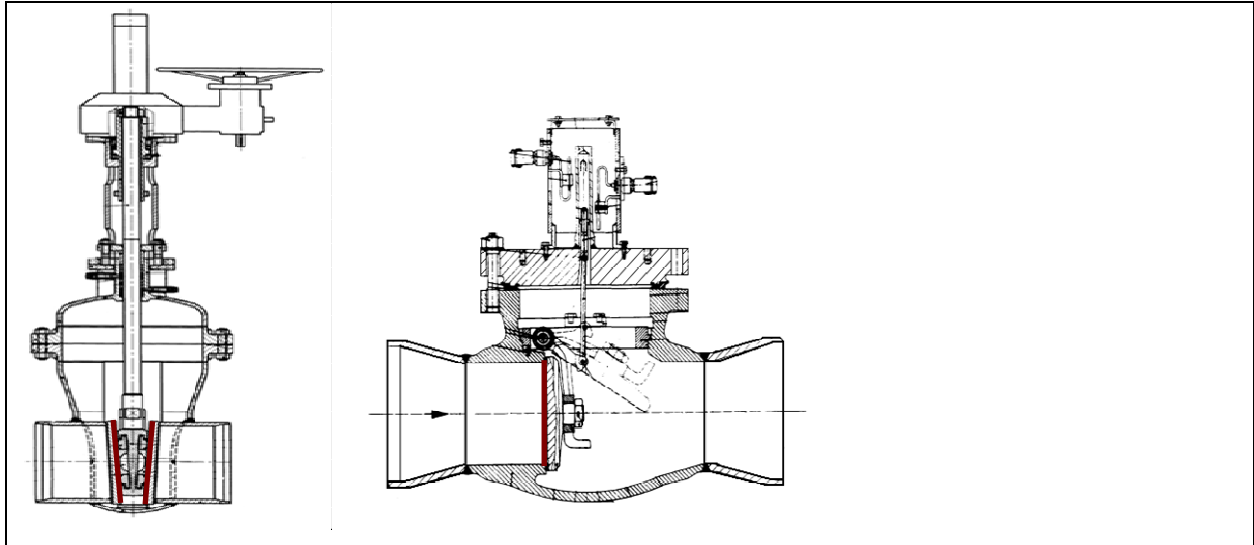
Gate valve (left) and check valve (right). The seal seat surfaces are marked in red.
